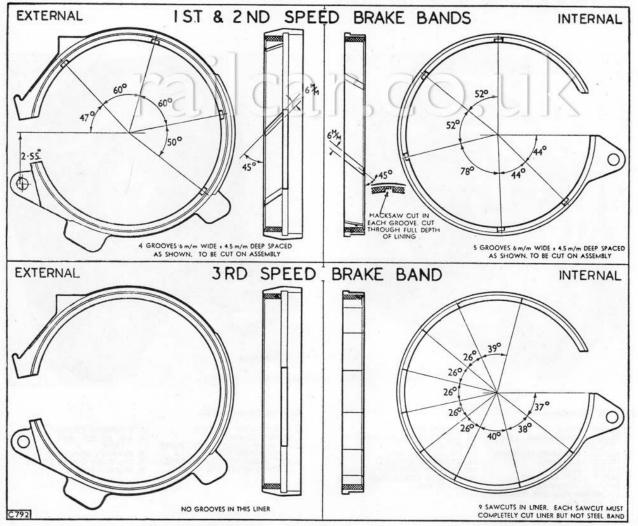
Dimensions for cutting oil grooves in brake band linings.
